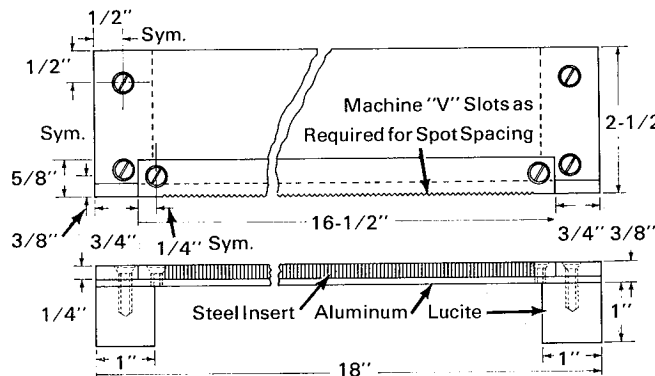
Spot Locating Device—Enables Accurately Overlapped Spotweld Location for Seam Weld by Spot Welder.
